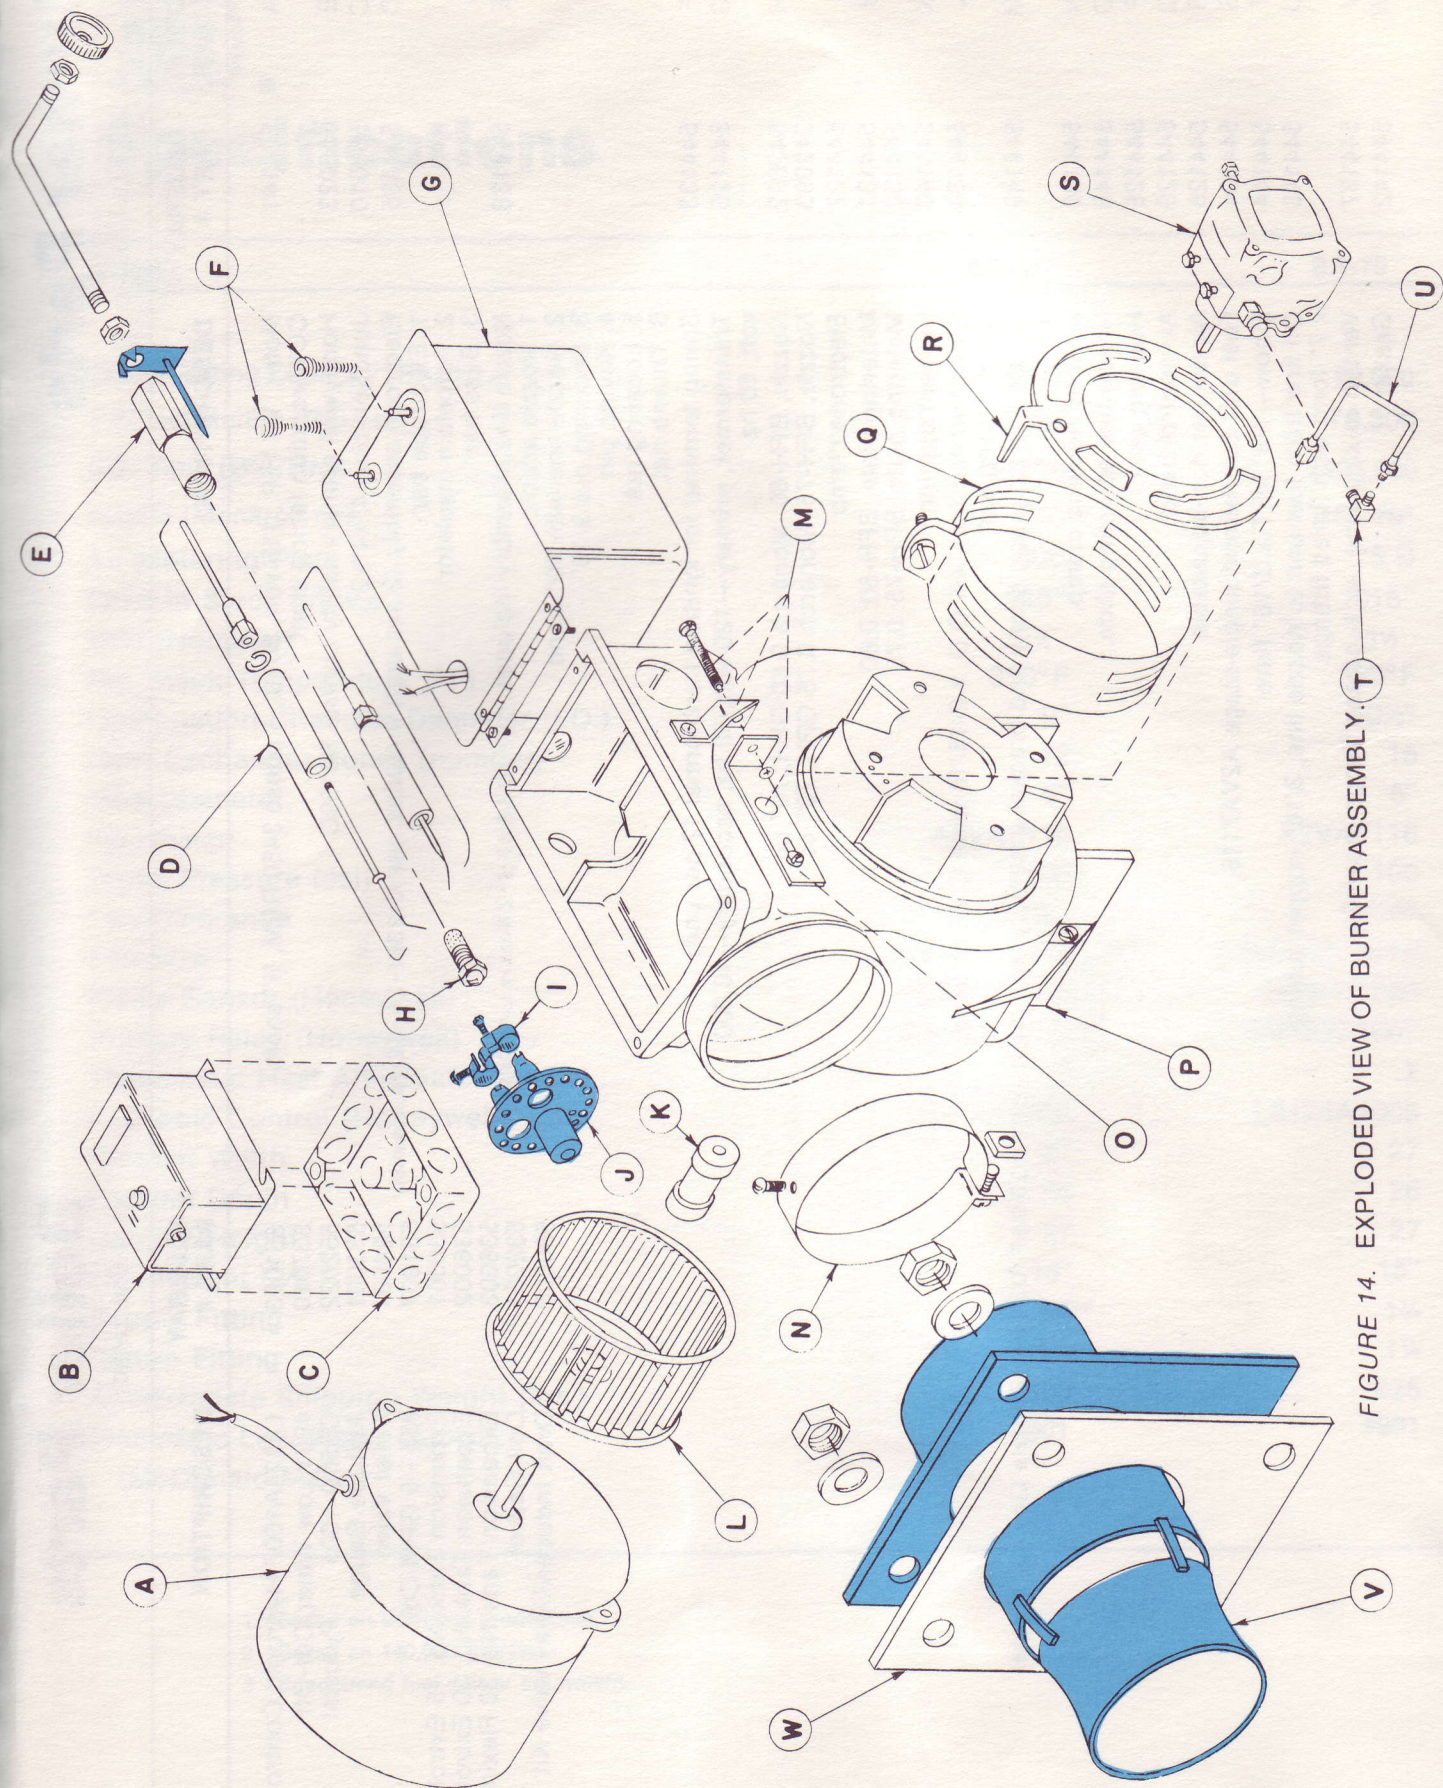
EXPLODED VIEW OF BURNER ASSEMBLY. T
